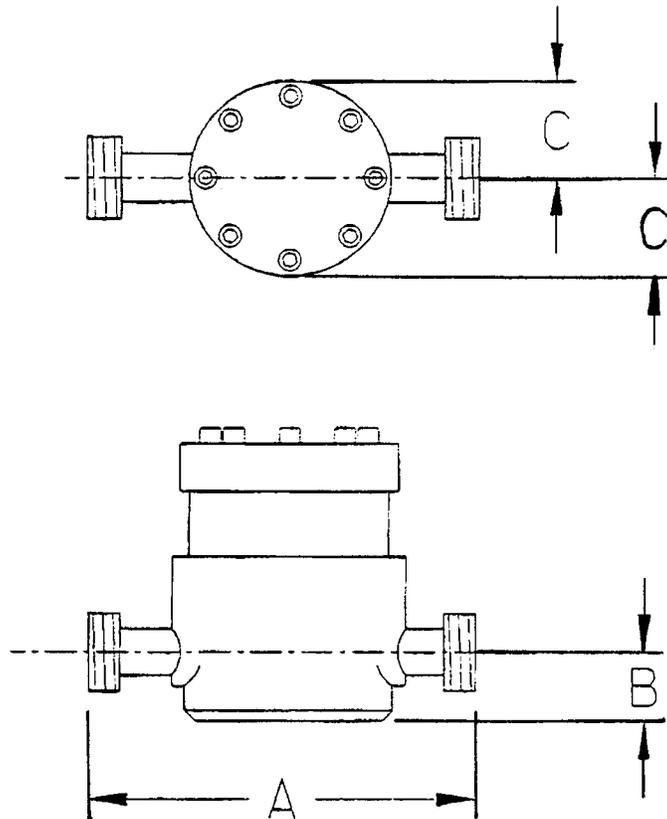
Pressure-Reducing Valve Envelope Dimensions
